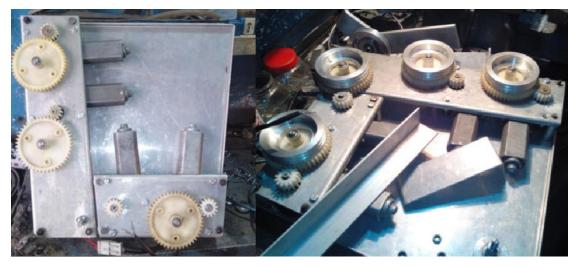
Backplate with Motors and Gear/Pulley Assembly Mounted. After the back plate completed elbow and shoulder parts were machined and assembled. As shown Figure *4.8*.
